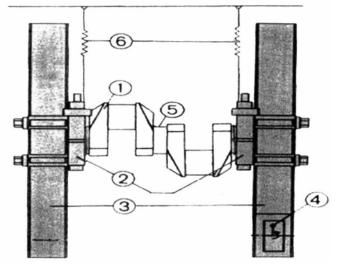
An example of testing arrangement of the resonance tester for torsion loading with double crank throw section
